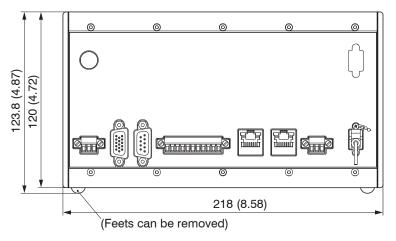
Dimensional drawing controller IFC2421/2465, dimensions in mm
